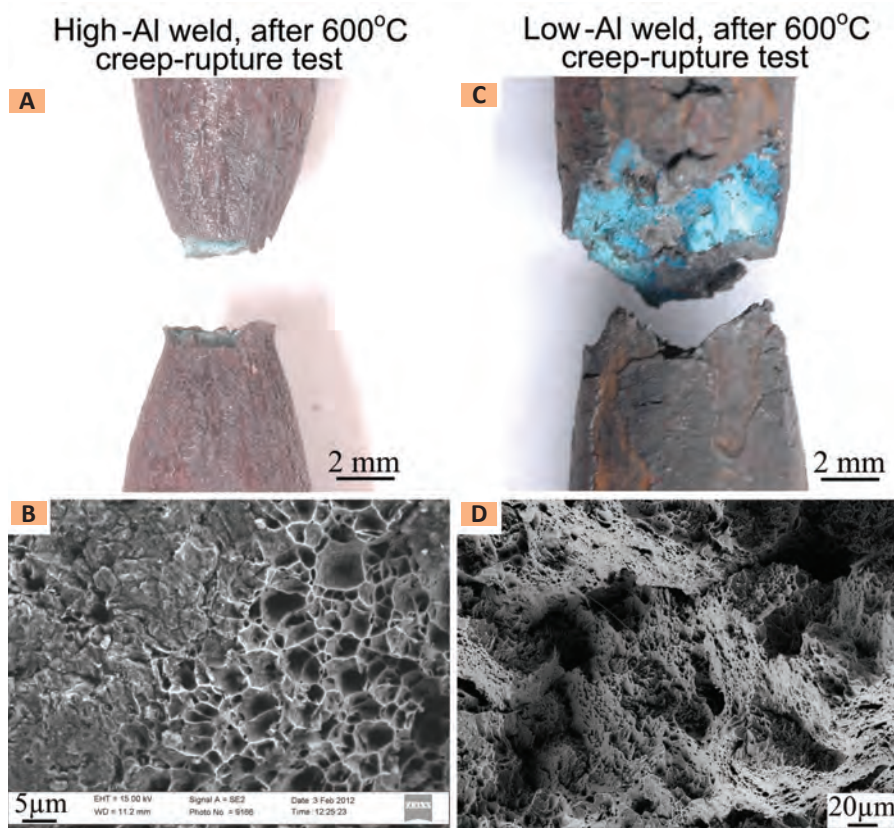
Weld specimens after creep rupture tests at 600°C. A, C — Macrographs showing much more necking with high-Al weld; B, D — SEM images of fractured surfaces showing clear microvoids characteristic of ductile fracture with high-Al weld.
